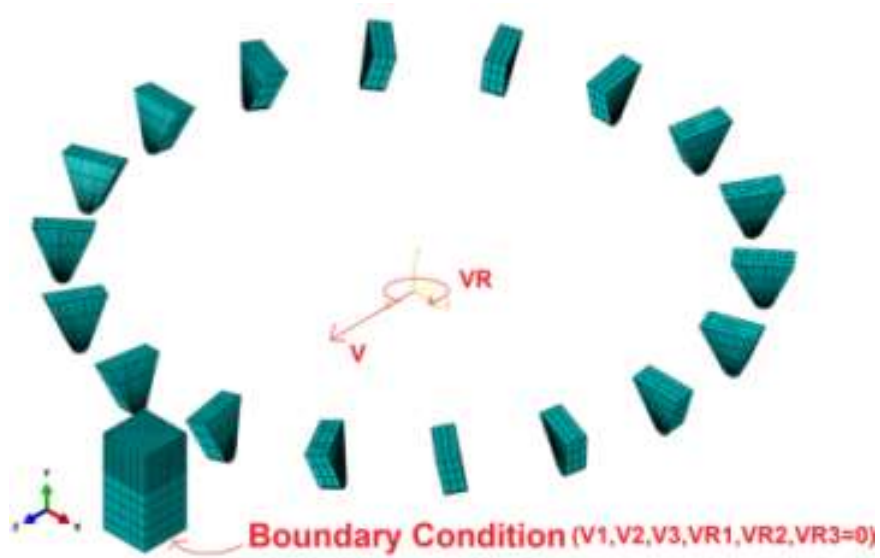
boundary conditions and load the sample tool and chip (V = rotational speed and linear speed = VR)
